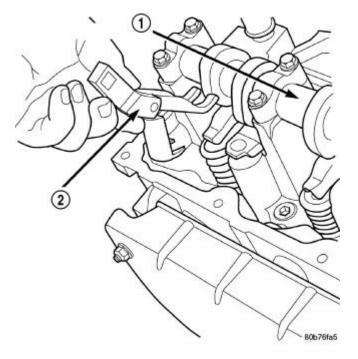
Rocker Arm Removal Courtesy of CHRYSLER LLC
